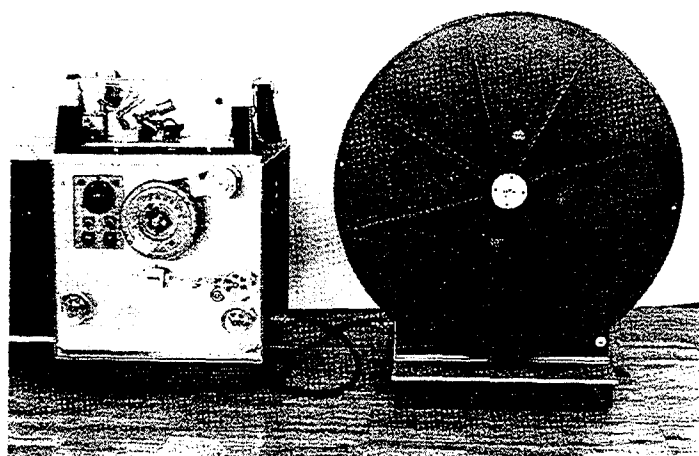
(Backview) The strip is unwound from the small reel through check points which sense any breakage. It is then wound on the larger 45-in. reel. Transfer of 45-in. reel from the rear preparatory position to the front feed position is done manually. The weld, coin, and trim units are mounted on the module top plate.
